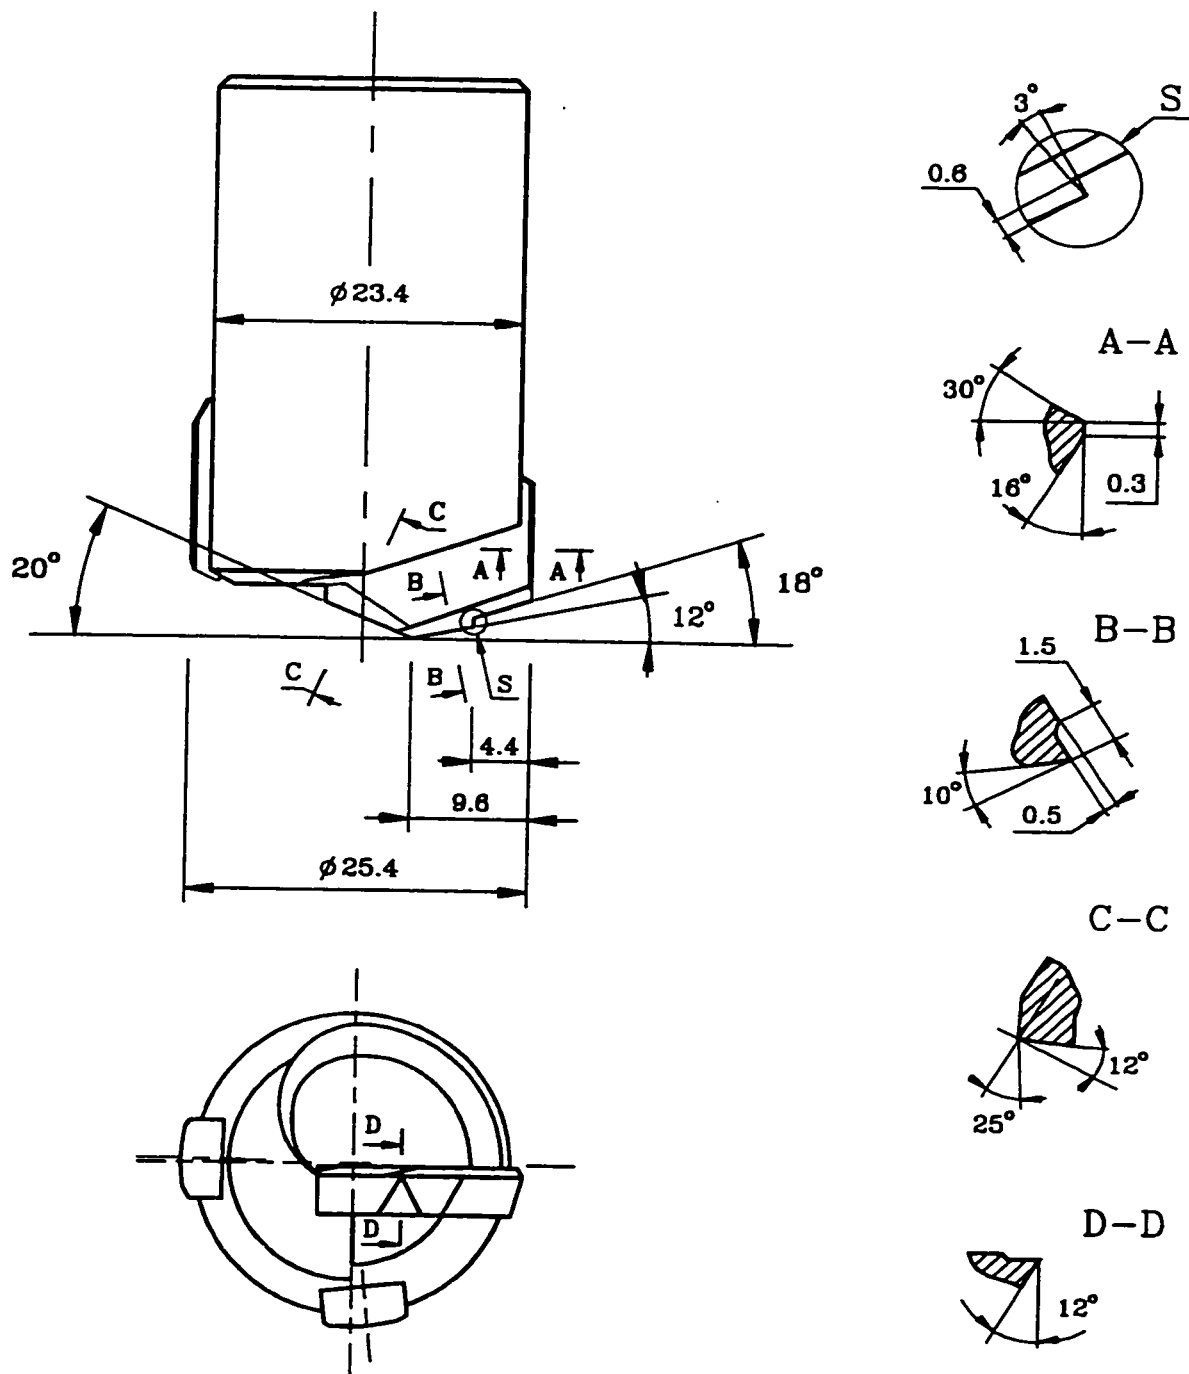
a. BTA-Type Drill of Heller Design (Cutting Geometry)
